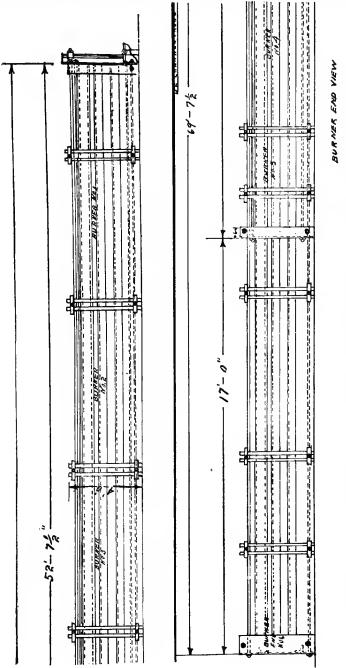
View of angle heating furnace showing the six burners. (Furnace cut into two sections.)
